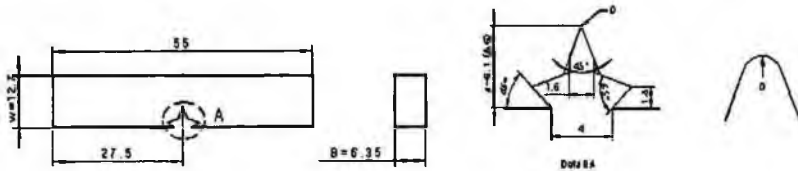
Shape and dimensions of 3PB specimen (unit: mm)
